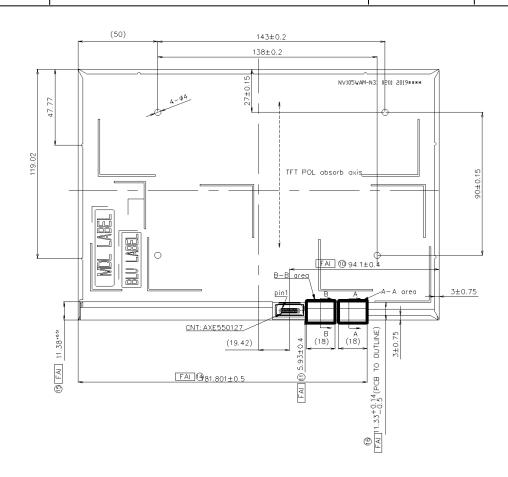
TFT-LCD Module Outline Dimensions (Rear view)
